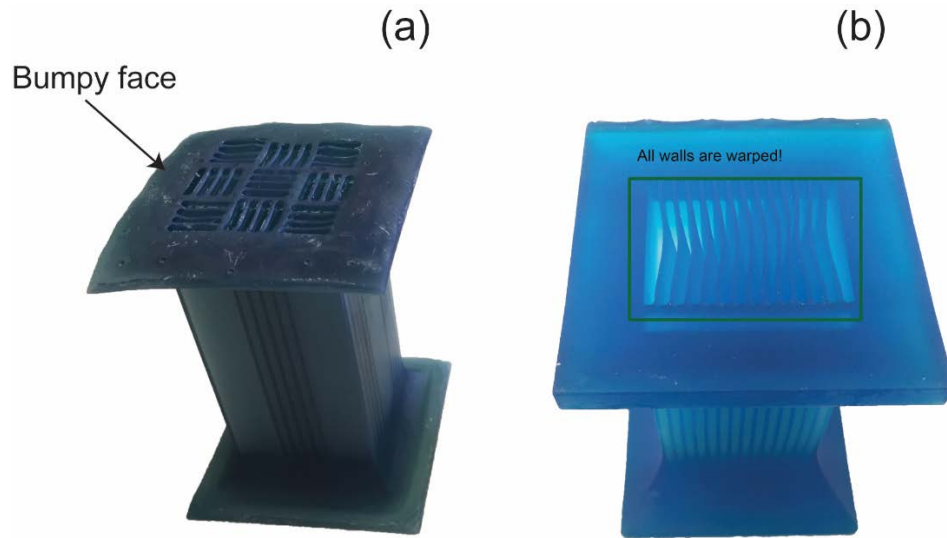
(a) Surfaces connected to the supports are printed bumpy and not totally flat; (b) For 3D printed parts, when wall are thin and large, warping happens
